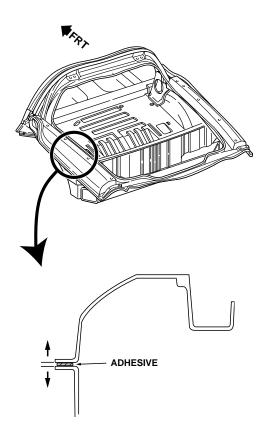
Adjust Rear Surround Using Adhesive Bead 1mm≤ 7mm In Thickness
